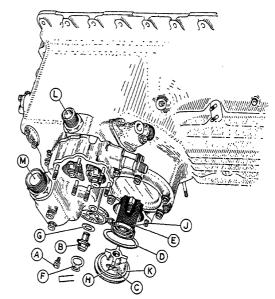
(right).—Removing CRANKCASE OIL FILTERS.
